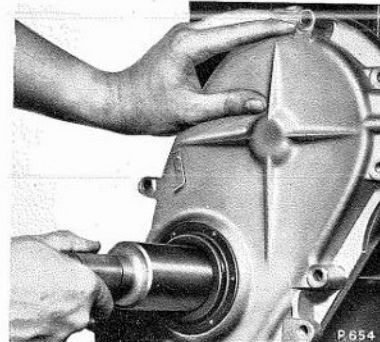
Centralising the timing cover, using Churchill Tool R.G.21
